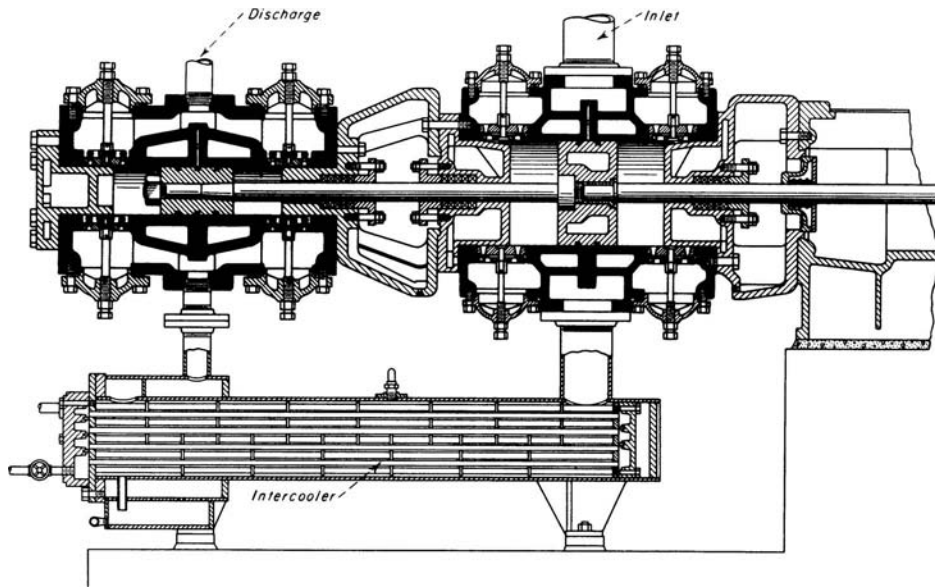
Two-stage double-acting compressor cylinders with intercooler.
